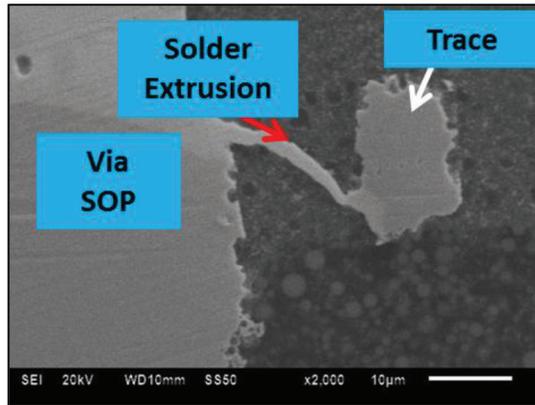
Cross-section SEM image of solder extrusion and solder bridging between via solder-on-pad (SOP) and adjoining trace.
